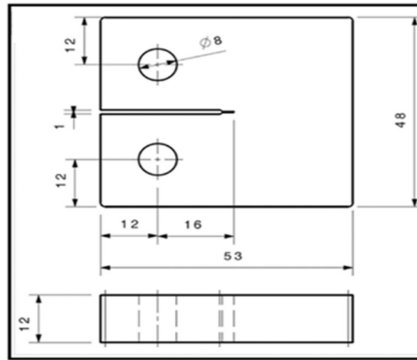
Dimensions of test specimens according to ASTM D5405 standard.
